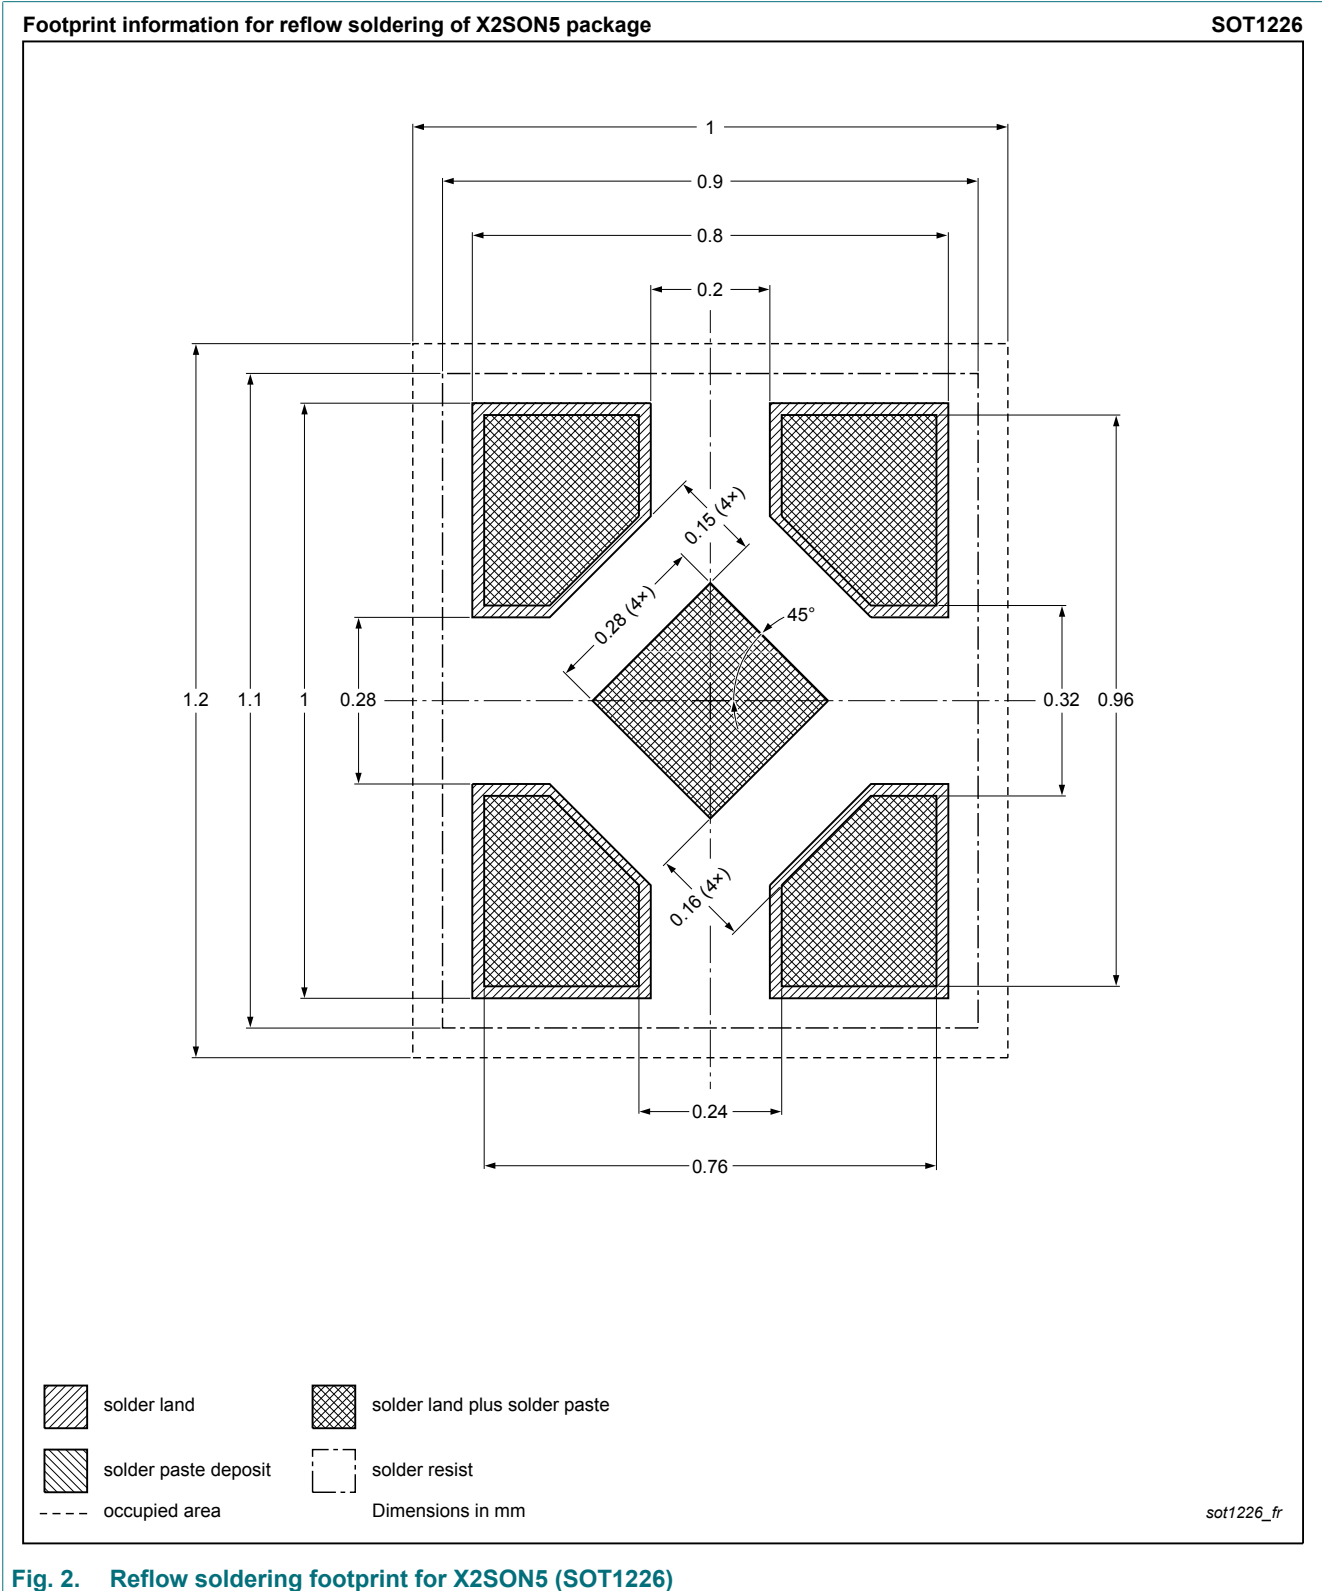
Reflow soldering footprint for X2SON5 (SOT1226)
